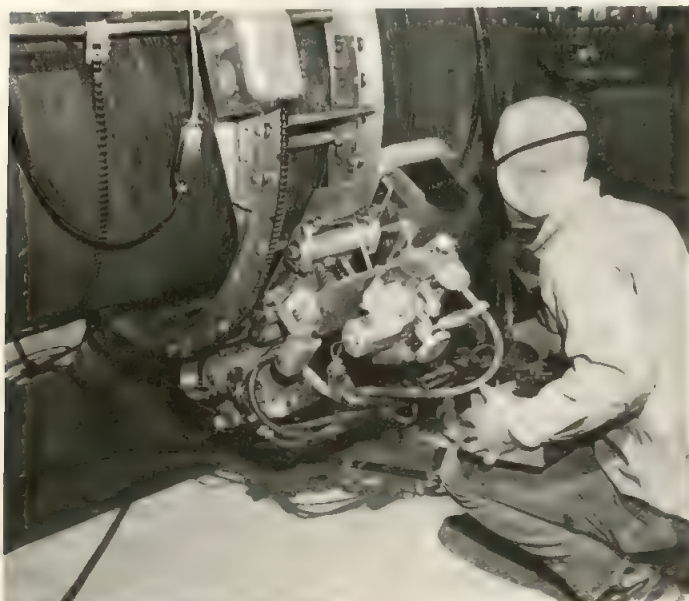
GMAW welding machine for large pipe.
